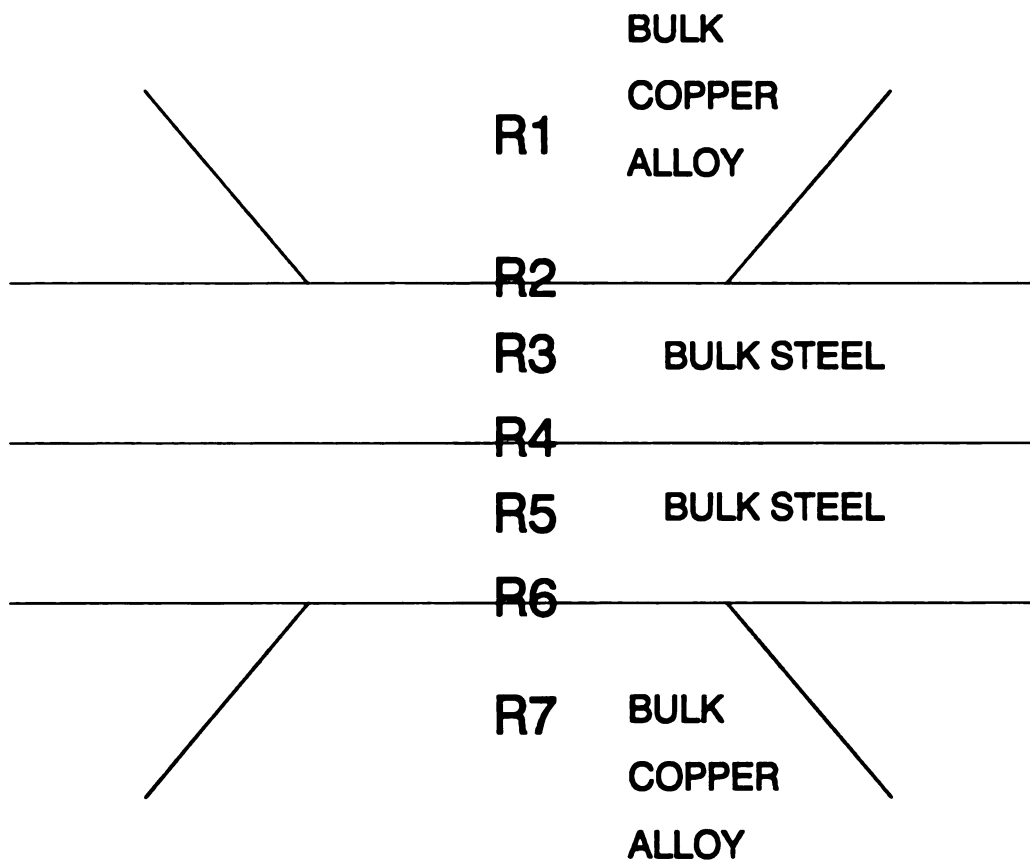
Schematic of resistances in a spot weld.
